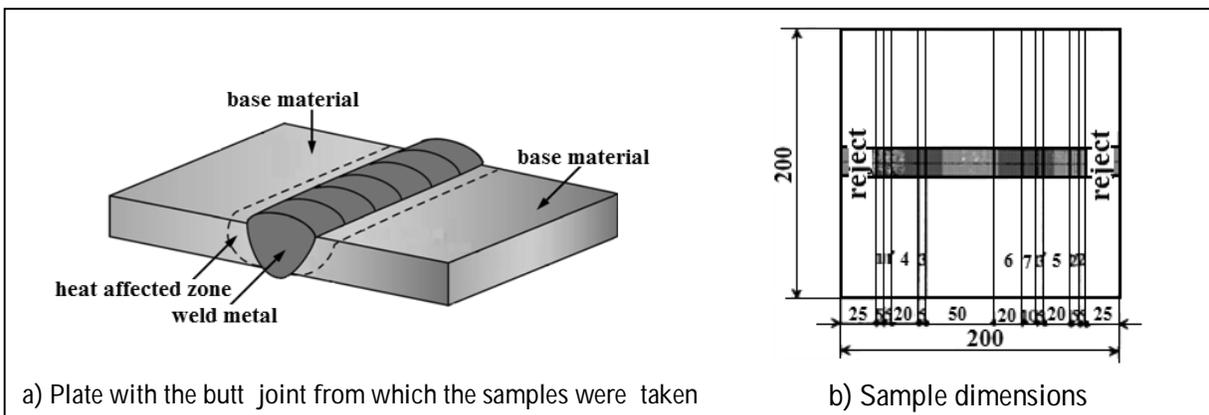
Plate with the butt joint and dimensions of samples from which the specimens were taken, depending on type of testing
